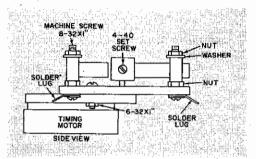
Stationary contacts (side view) should be positioned to provide gentle contact and timed to extinguish the light just before the ring reaches it.
